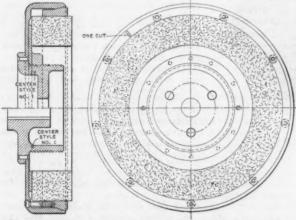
Details of the Graham Pressed Steel Grinder Chuck.
